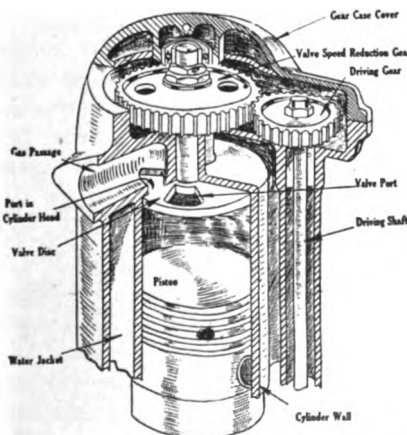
SHOWING DETAIL OF CYLINDER MECHANISM
